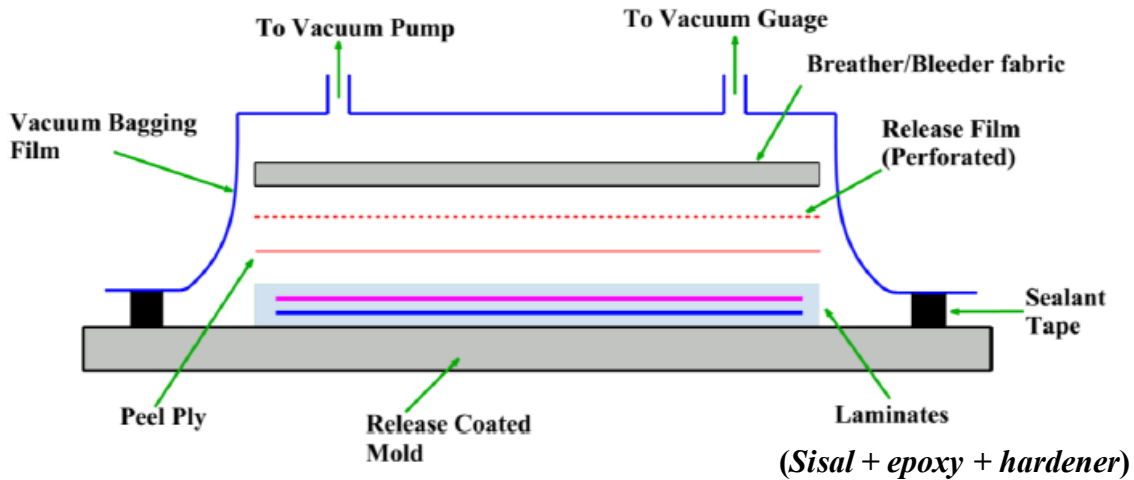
Hand Lay-up Assisted by Vacuum bagging technique.
